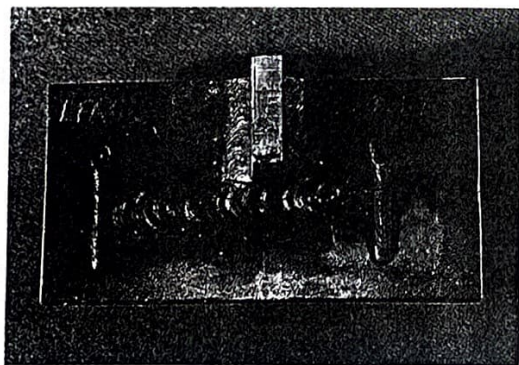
Weld metal fatigue crack which initiated in the run-off area of helical repair LFA14. ($\times 1$)
